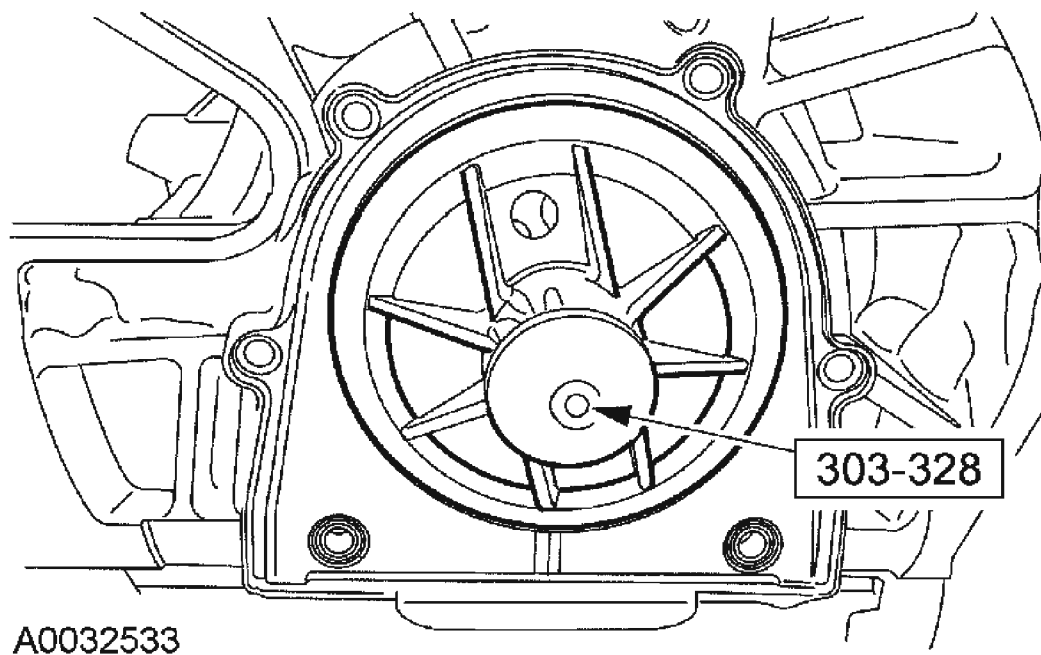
Installing Crankshaft Rear Main Oil Seal Using Special Tool
